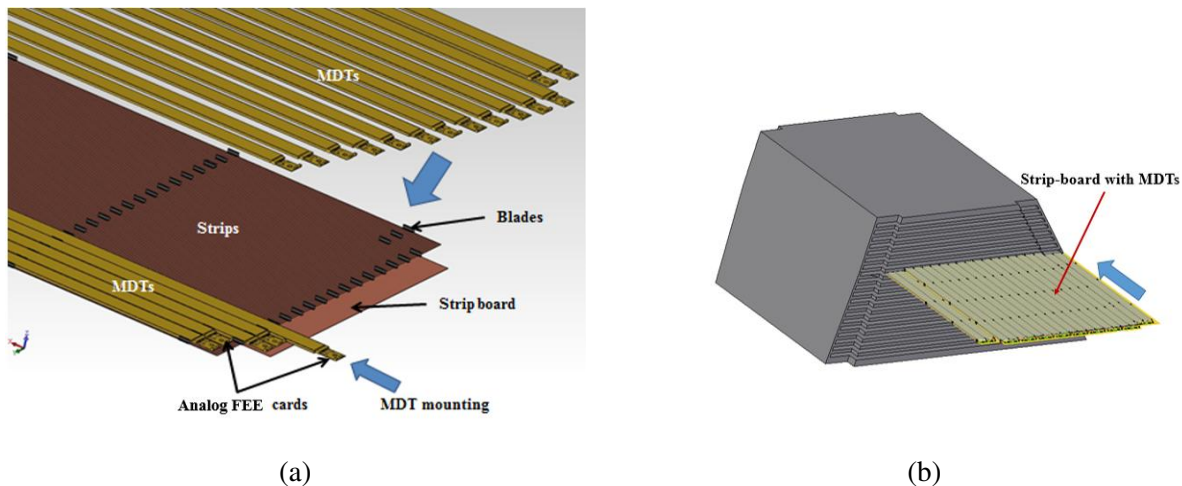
(a) Mounting of MDT detectors on the strip board, forming the detecting plane. (b) Assembly of barrel module with detecting layers (MDTs with strip board and corresponding electronics).
